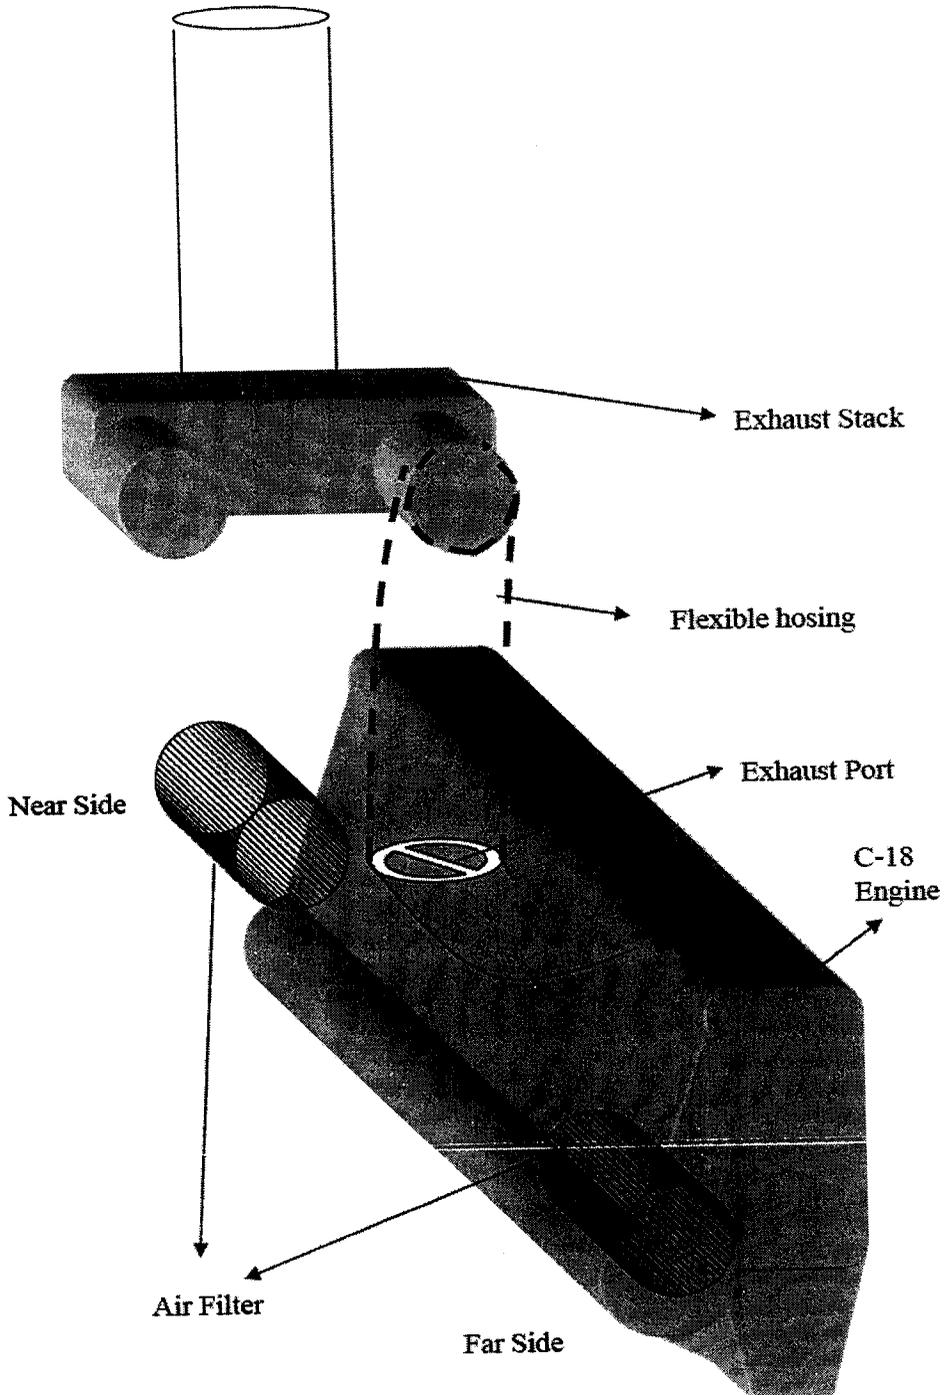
Proposed Layout of C- 18 Exhaust Stack
